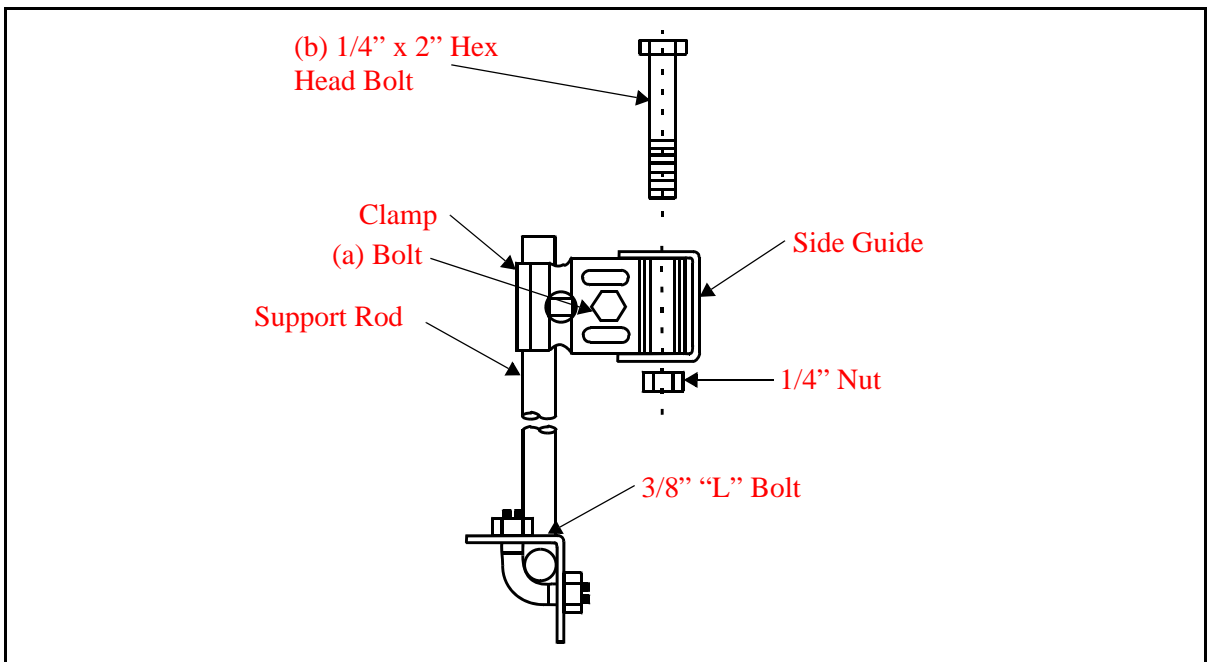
Secure Rod to Mounting Angle and Slip Clamp Over Support Rod and Tighten Bolt
